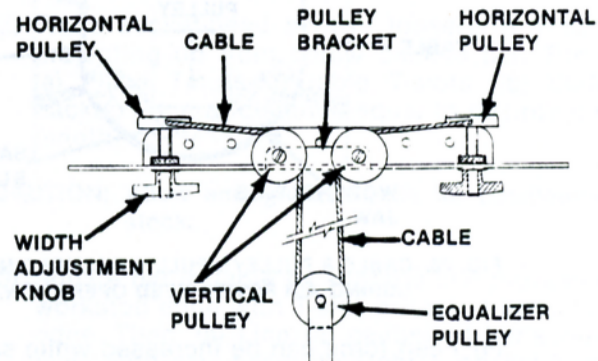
CABLE & PULLEY ASSEMBLY -- REAR CROSS-SECTION VIEW.
